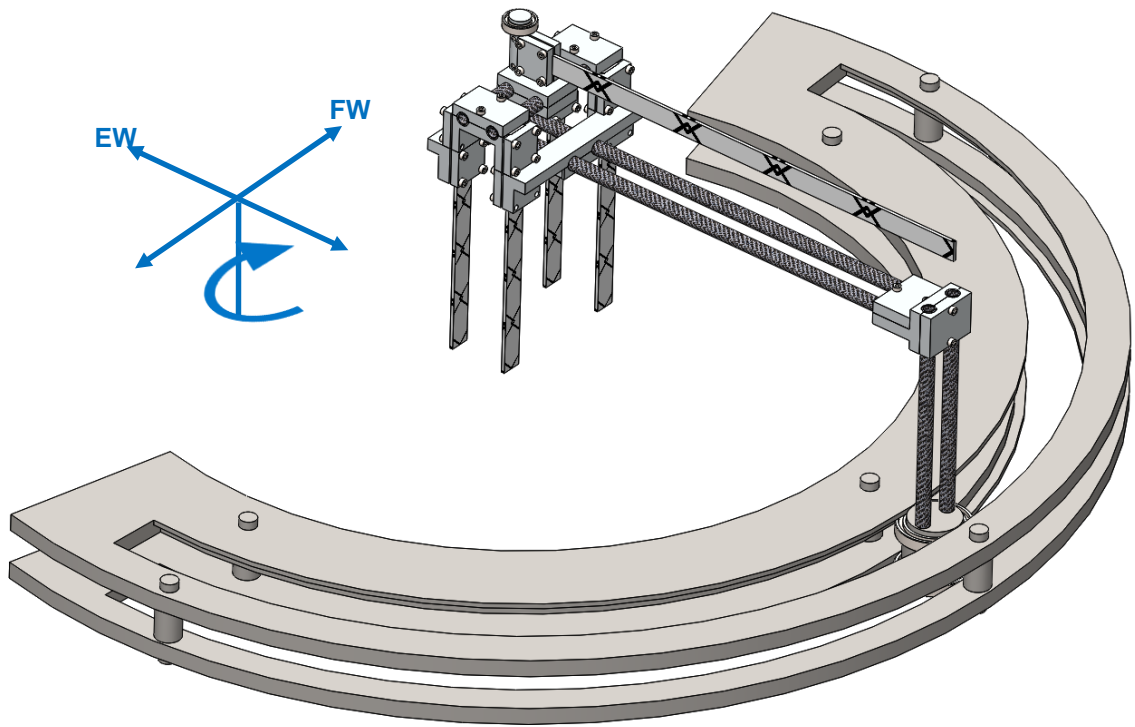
Plunging and lead-lag Spring subassembly – locking the plunging and lead-lag motions.
